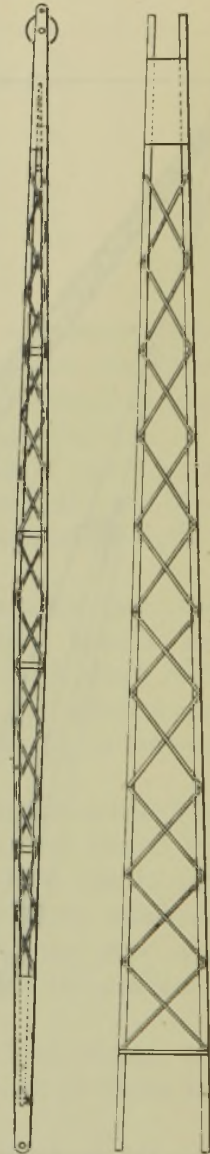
Lattice Steel Jib in Elevation and Plan.
